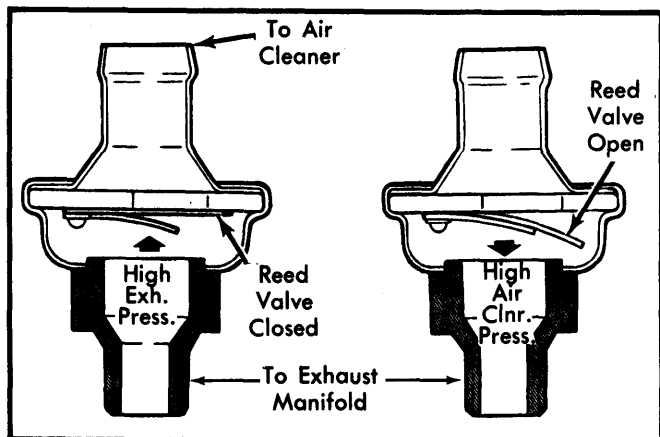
Thermactor Pulsed Air (Reed) Check Valve
